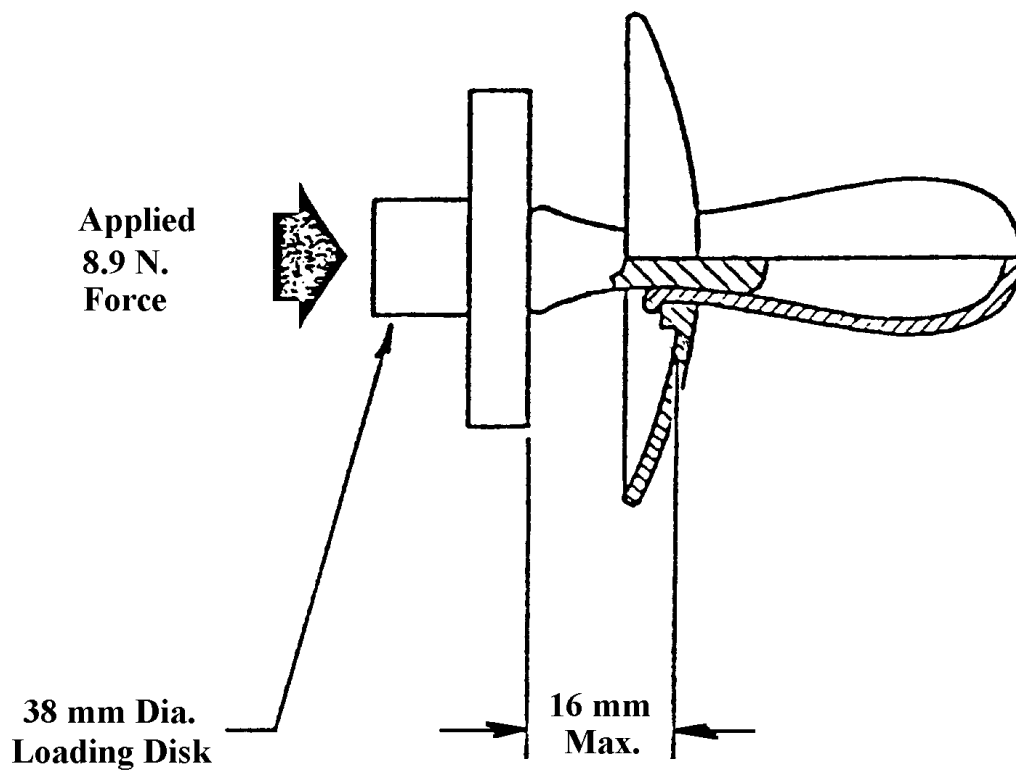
DIMENSIONAL REQUIREMENT IN PROTRUSION TEST
